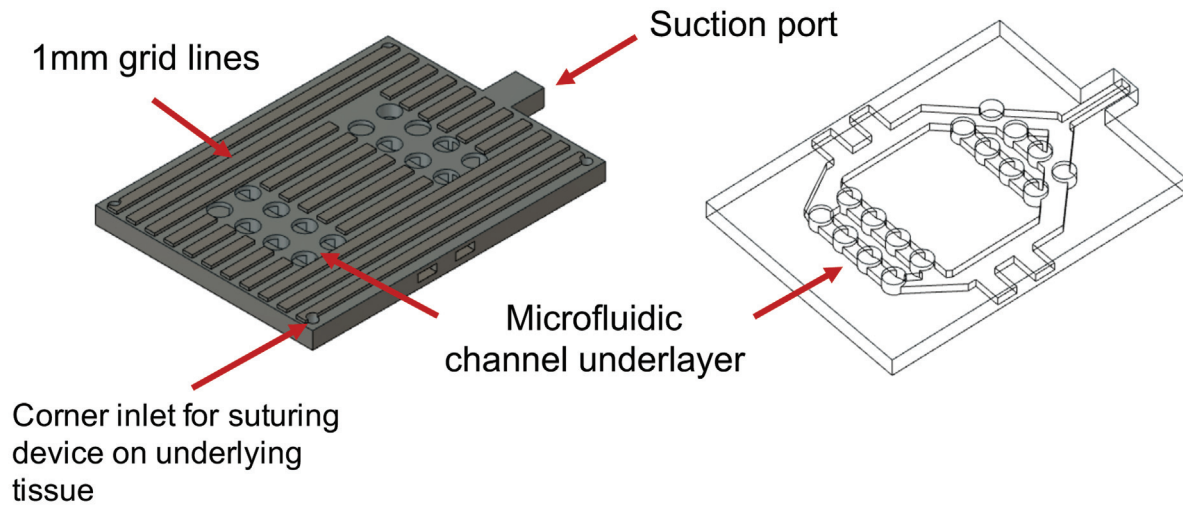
Illustration of the three-dimensional printed device including the in-built microfluidic mechanism.
